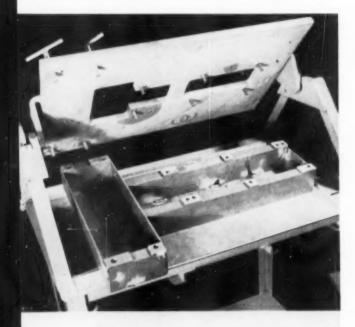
Top pan assembly fixture shows low-cost tooling made possible by production redesign.
